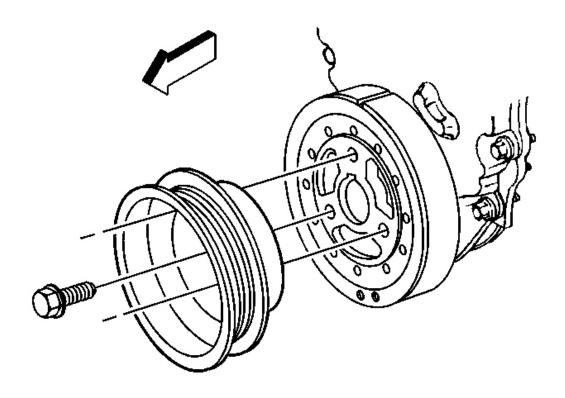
View Of Crankshaft Pulley & Bolts Courtesy of GENERAL MOTORS CORP.
